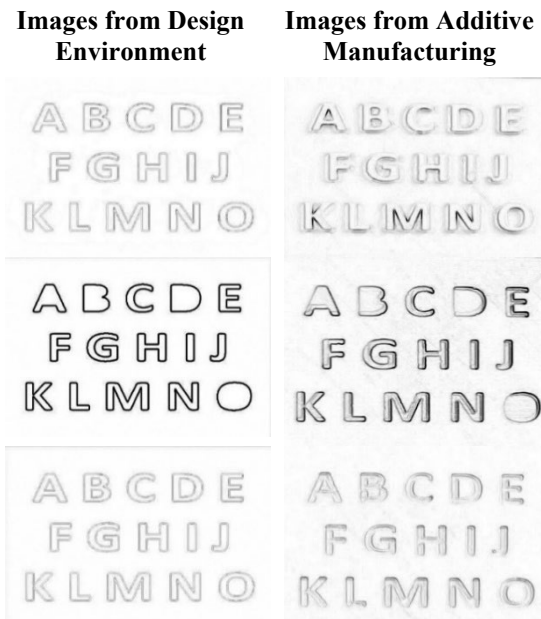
Images processed with edge detection from top to bottom for embossed with join, cut and cut-half, respectively.
